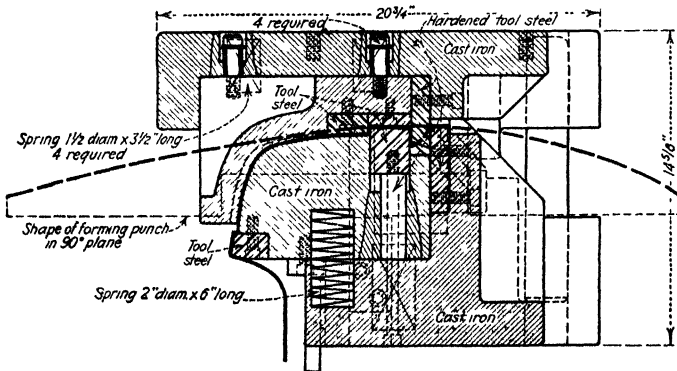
Trimming, flanging, and forming in modified stretcher die.
